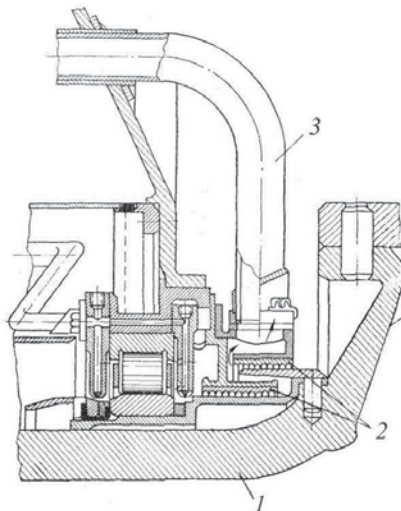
Removal of gases that have penetrated through the first labyrinth of the turbine bearing [15]:
